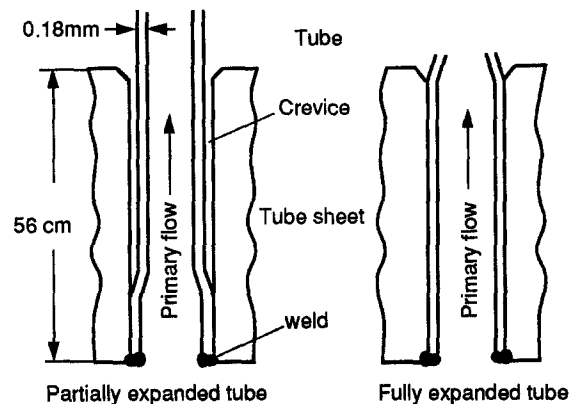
Tube-tubesheet joint geometries of steam generators used in PWRs.
